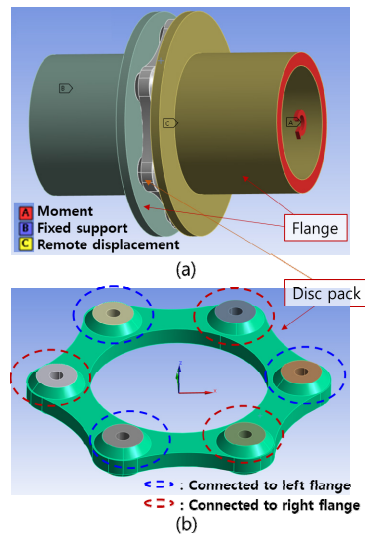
Boundary conditions at (a) flange loading point; (b) bolt area of a disc
